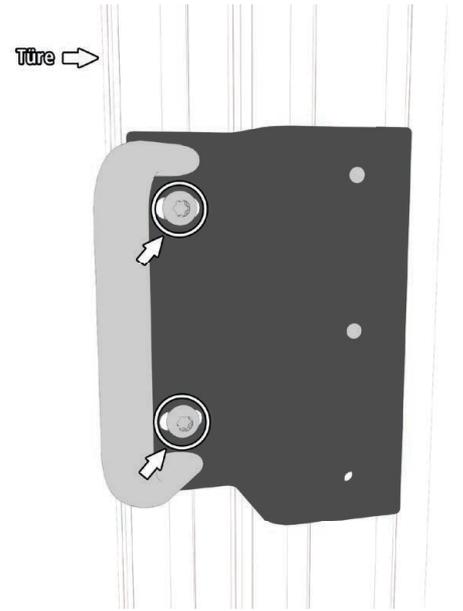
Attach the mounting plate with the anchor plate to the profile and align with the process lock. Tighten the Torx screws M8 x 12 mm.
